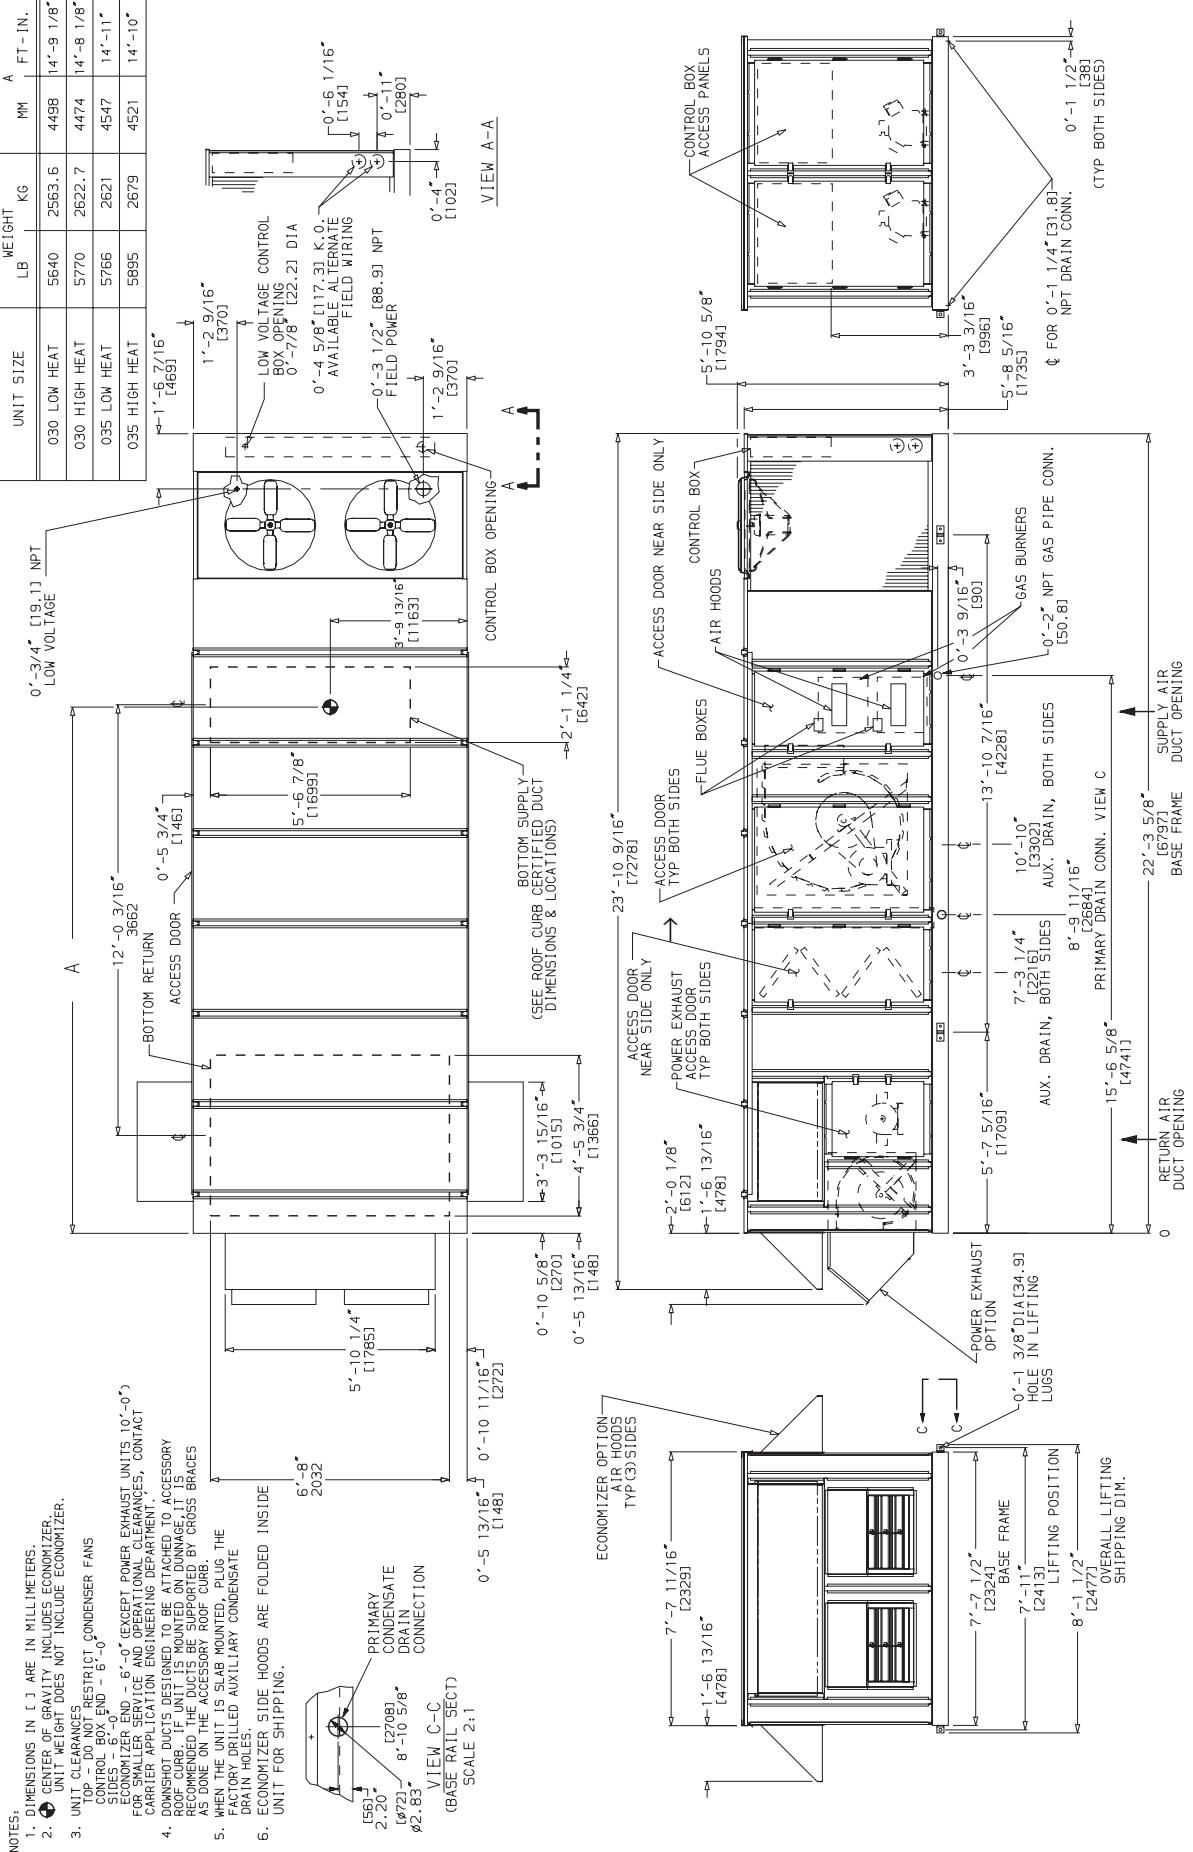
Base Unit Dimensional Drawing — 48ZG,ZN030,035 (Standard Chassis)
